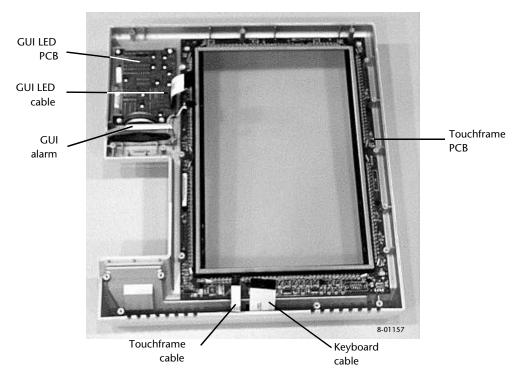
10.4-inch GUI touchframe PCB and GUI LED PCB locations
